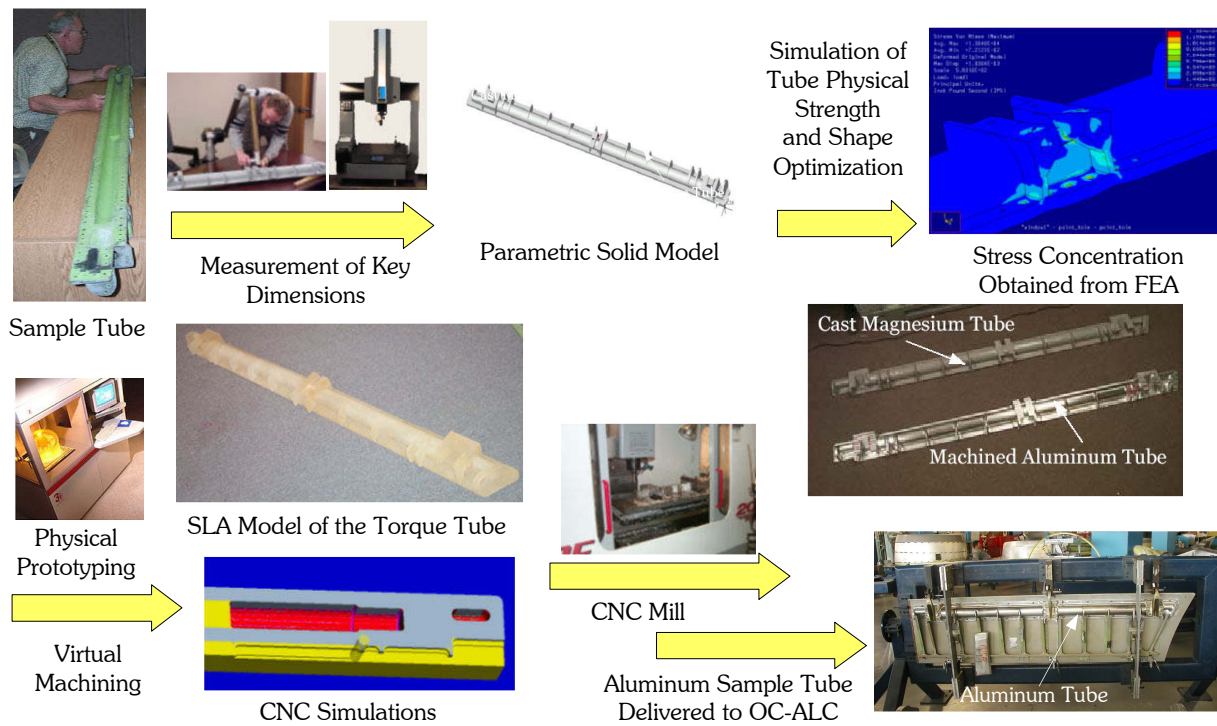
Reverse engineering, re-engineering, and manufacturing of AWACS torque tubes.
